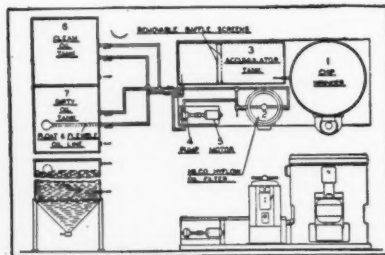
Diagram of Oil Recovery Assembly Shown in Fig. 1
